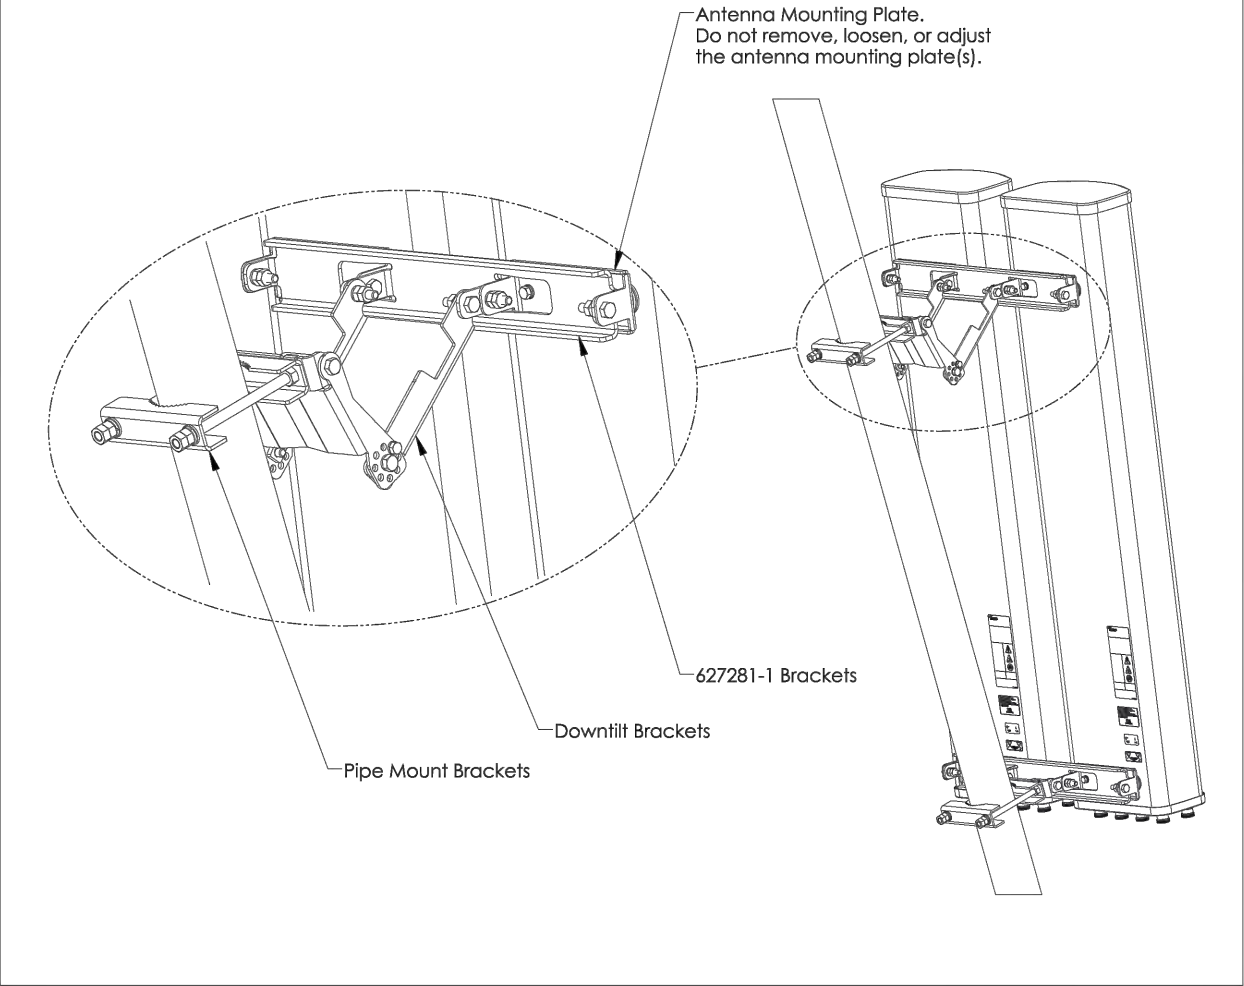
Antenna Assembly Attached to Mast Using BSAMNT-SBS-1-2 Mounting Kits.
